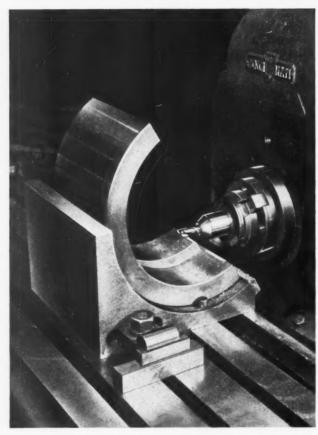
A horizontal milling machine is employed for cutting oil slots in a bearing shell.
